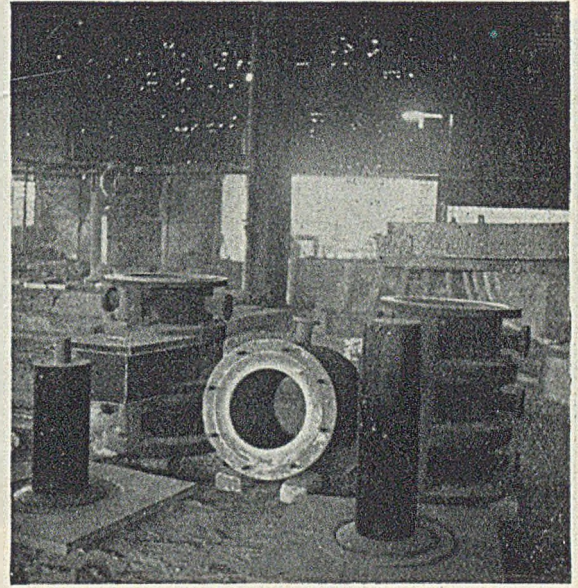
PATTERN AND CHILL EQUIPMENT FOR THE ROLL CASTINGS.
